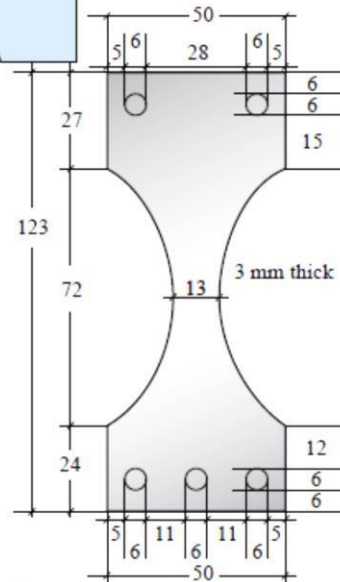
b Geometry of typical single ADAS Device used (Scale: 1:1) (All dimensions are in millimeter)
